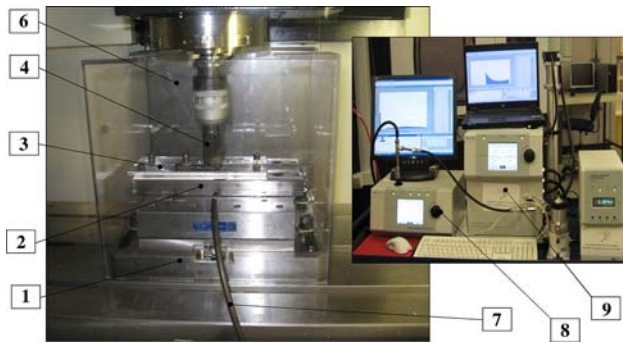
Setup for dust collection and measurement—1: Three axis dynamometer; 2: Support; 3: 6061-T6 aluminum workpiece; 4: Cutting tool; 6: Dust cover; 7: Air suction tube; 8: APSTM; 9: SMPSTM
